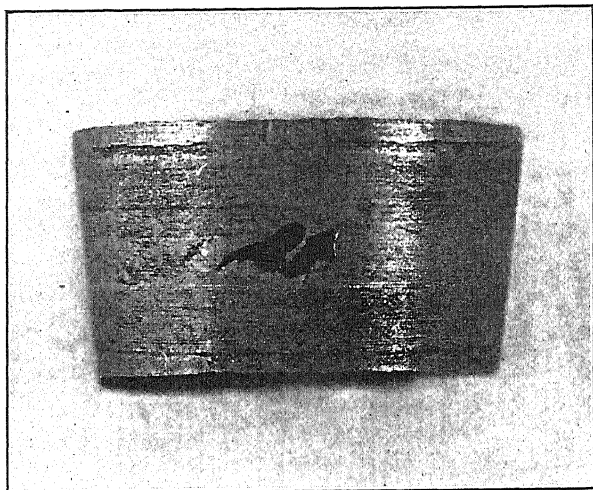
BUTTON, 1 IN. IN DIAMETER, CUT FROM STEEL CASTING.
